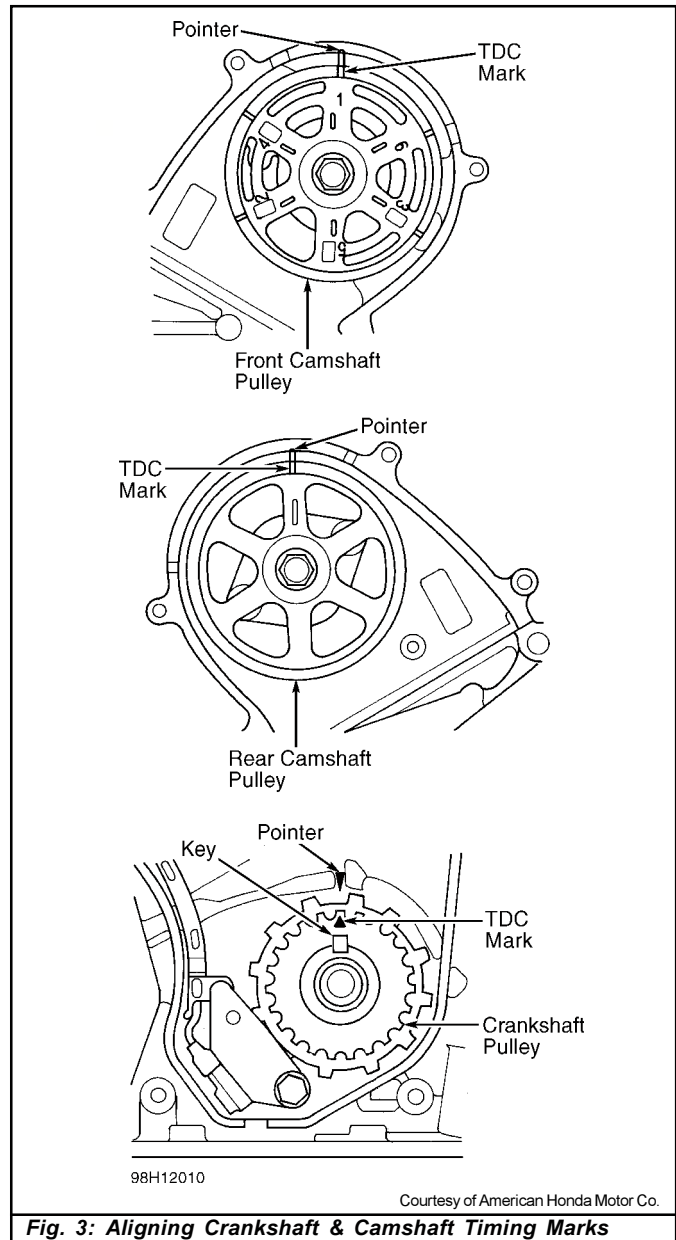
Aligning Crankshaft & Camshaft Timing Marks
